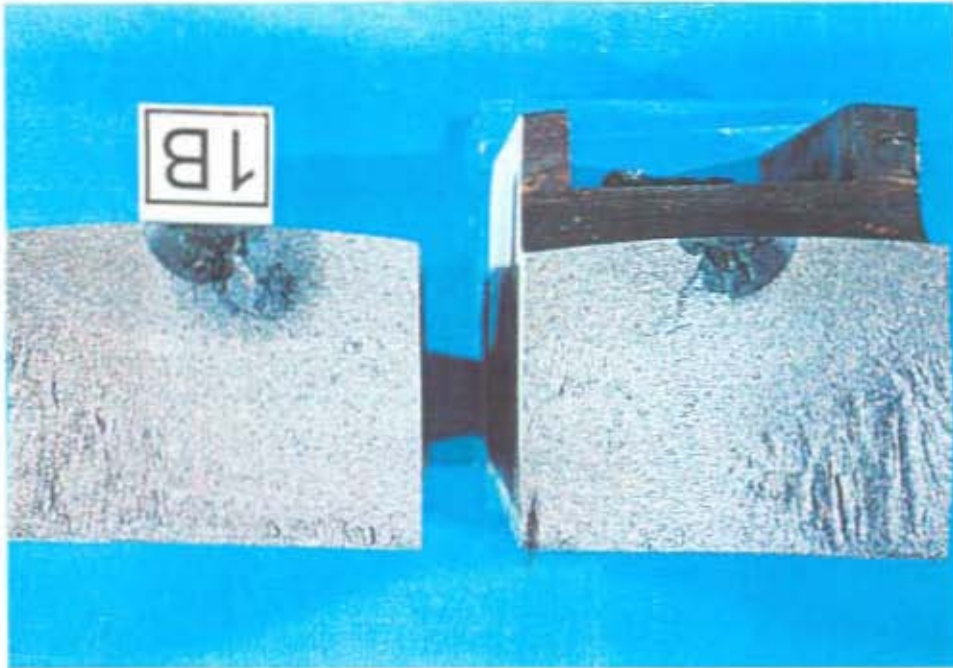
Exposed Crack Surfaces of the Defect Detected in the Weld Repair at Keyway 1B.
